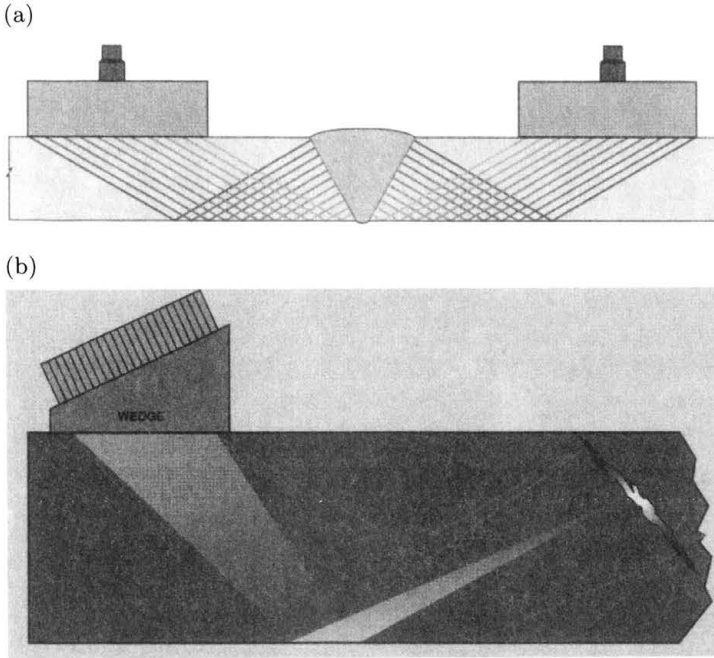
Weld inspection using phased array. Beam multiplexing (a) and beam steering and focusing (b). Courtesy of R/D Tech.
